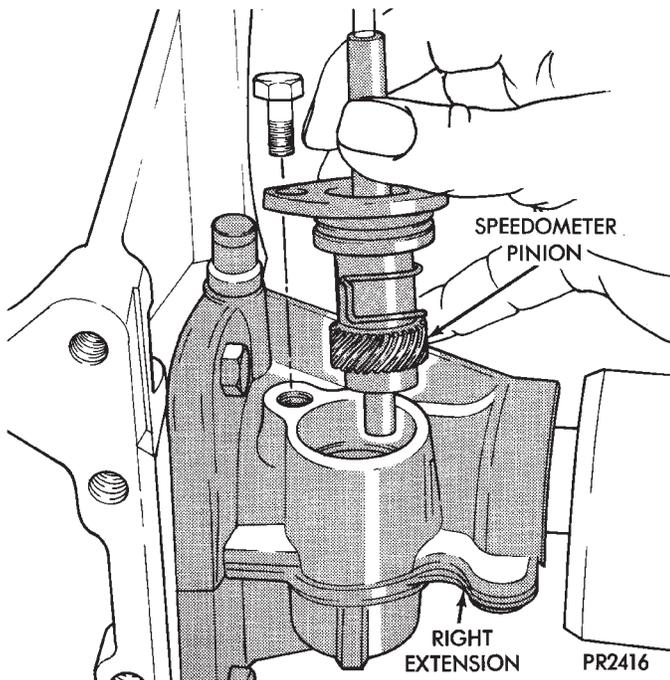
Remove Speedometer Pinion Clamp (For Right Driveshaft).
